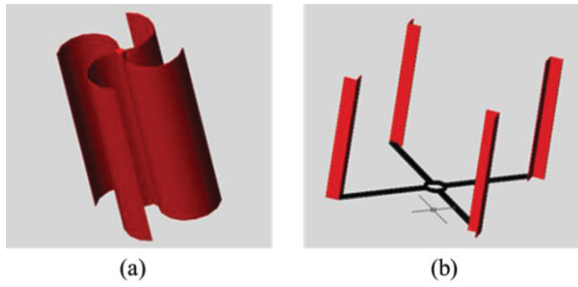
(a) Savonius rotor blades (b) straight bladed Darrieus rotor blades
